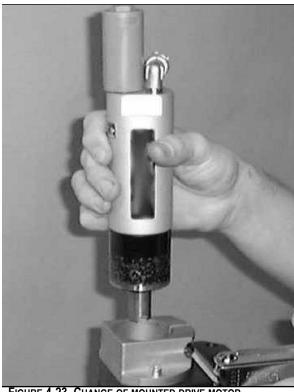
, CHANGE OF MOUNTED DRIVE MOTOR
